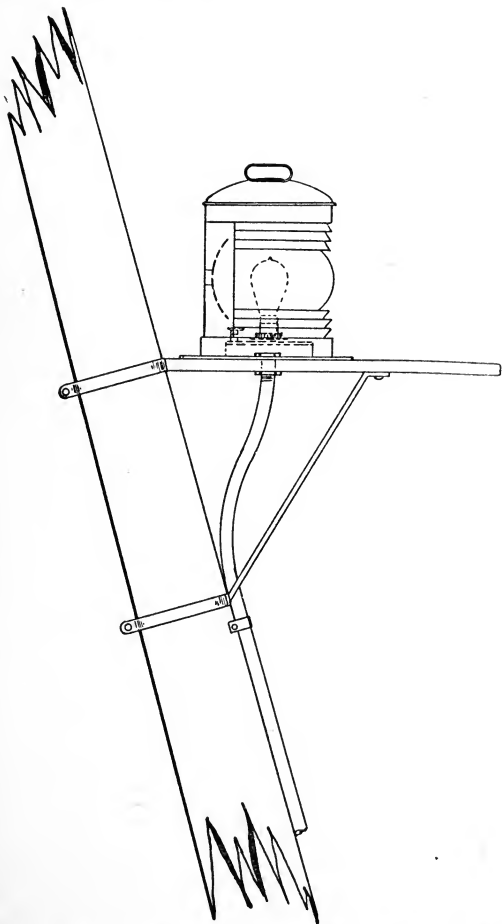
FIXING AND WIRING OF MASTHEAD LAMP.
